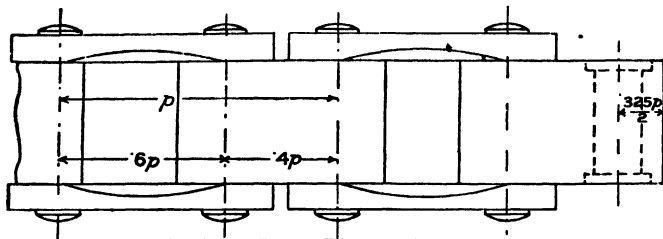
DOUBLE FLAT-LINK GEARING CHAIN.
